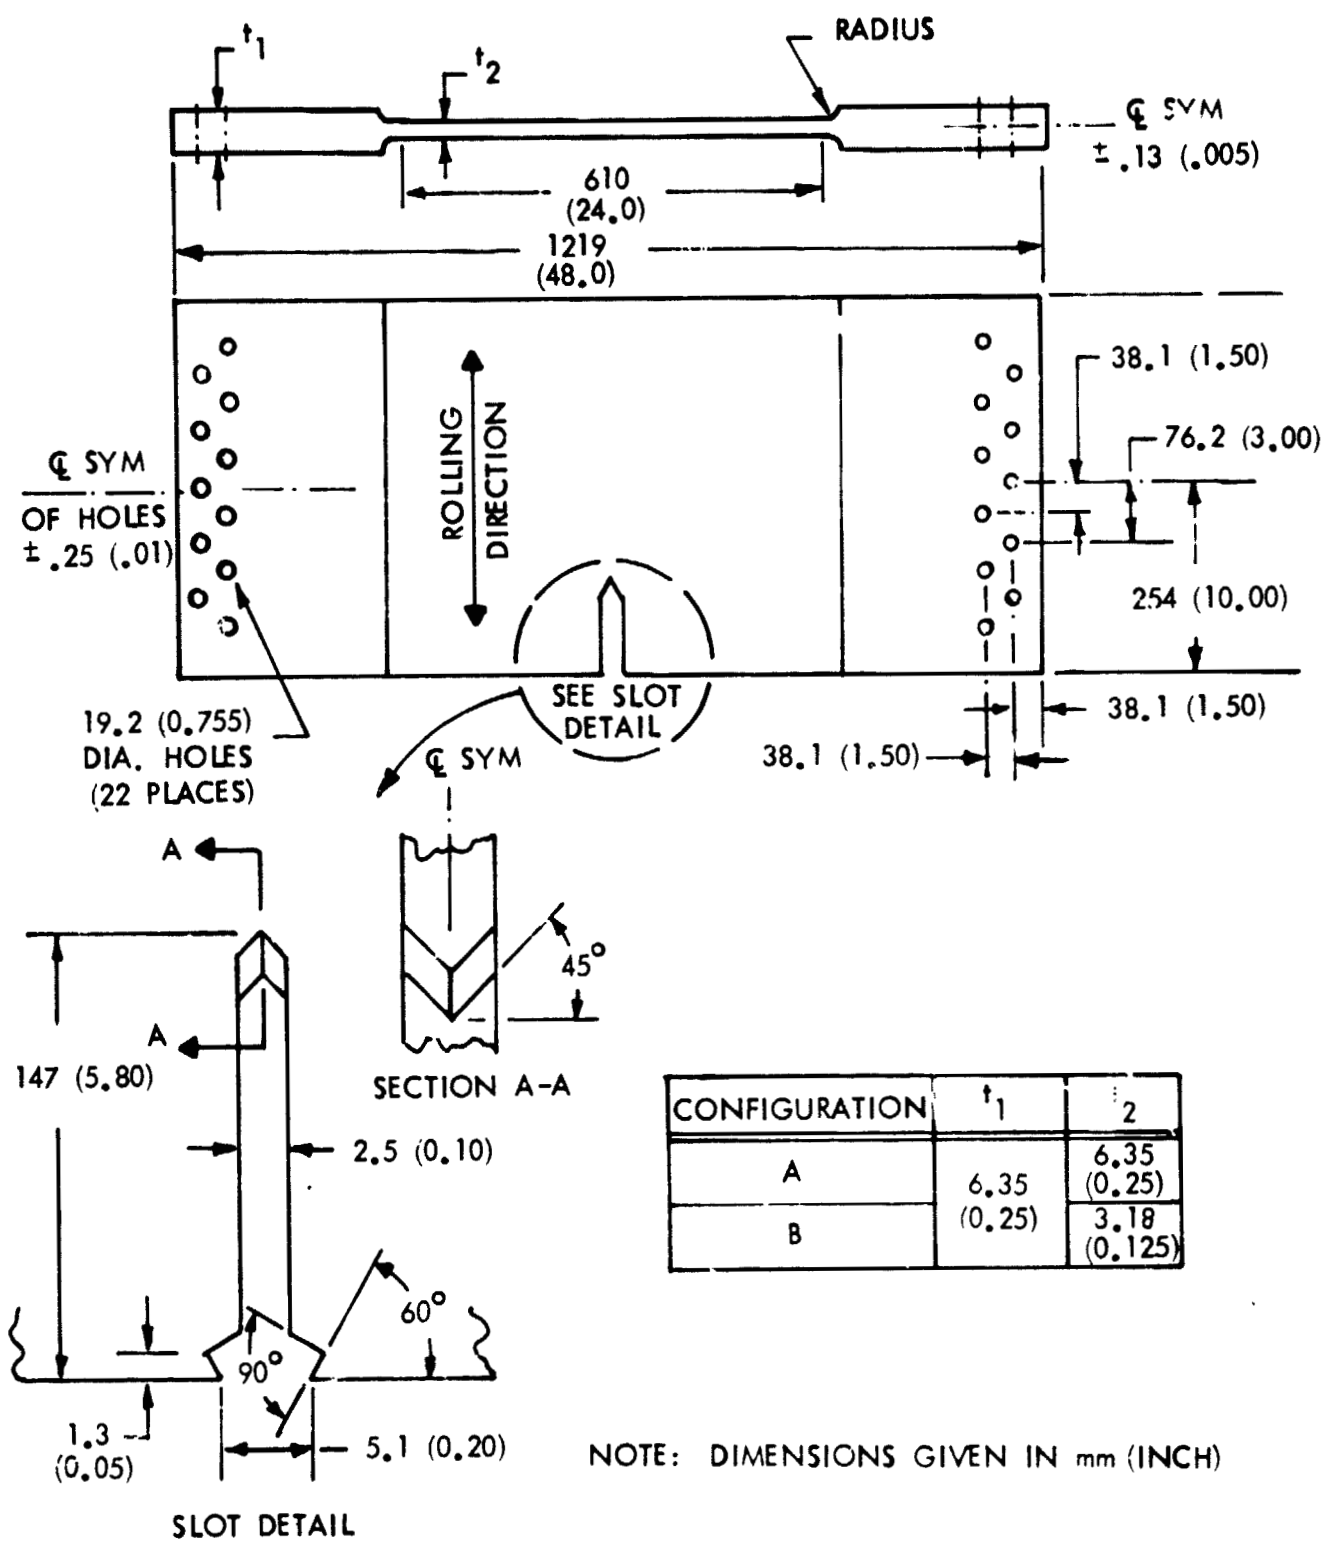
450K (+350F) SENT FRACTURE SPECIMENS
